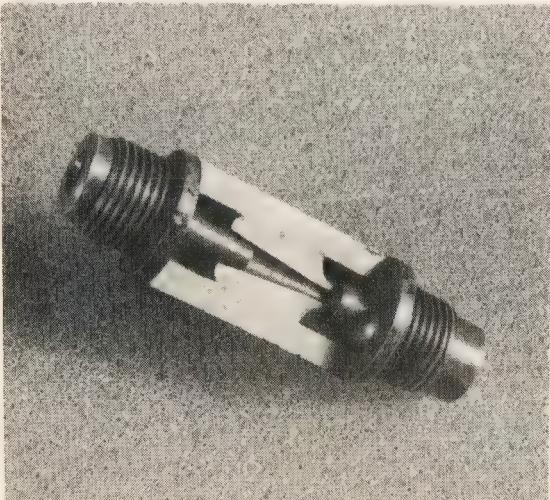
"Cert" injector body and elbow clack, part machined (Bill Carter's collection).
